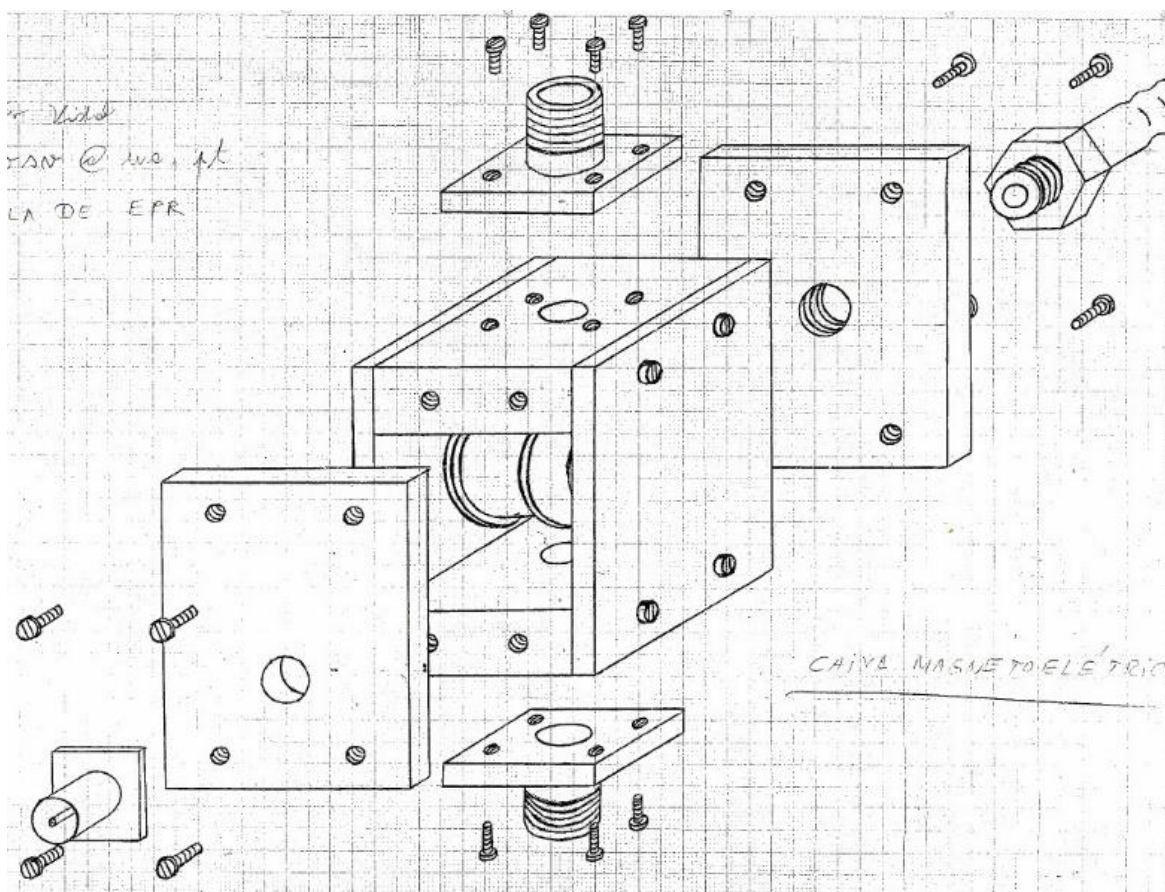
Technical drawing of the developed box containing the Helmholtz Coil in isometric projection.
